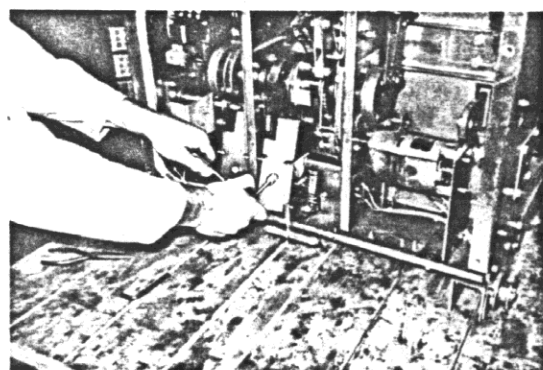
Remove Two Mounting Bolts for Switch Assembly. Remove Two Screws Fastening Switch to the Bracket.
